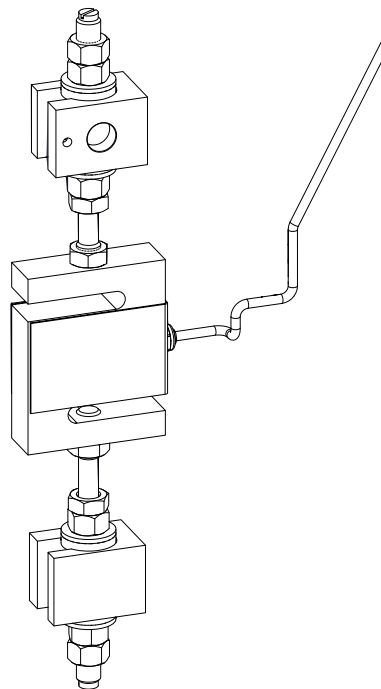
Fitting Load Cell Assembly into Blocks (After)
